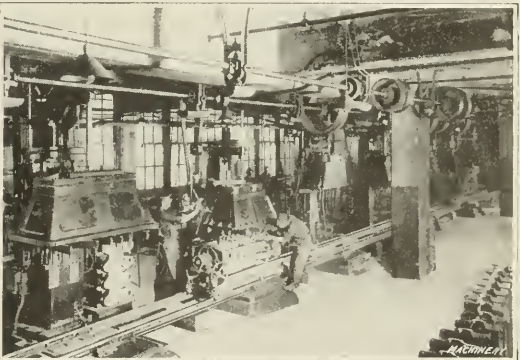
At the Packard Motor Car Co.'s factory in Detroit, crankcases are drilled in jigs, which run on rails leading from machine to machine. These jigs are supported on trunnions and have index-pins to enable all surfaces to be brought into the drilling position
